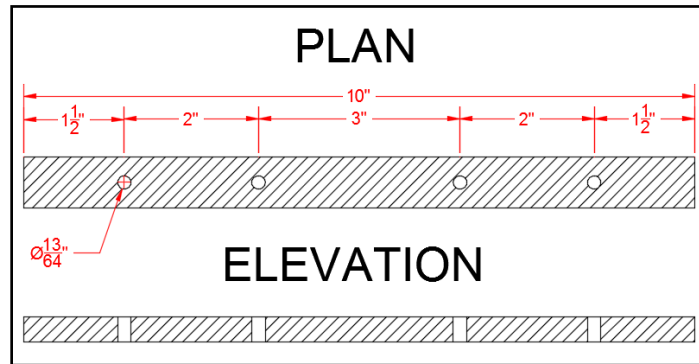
Specially designed mounting bracket used to attach LVDT's to specimen.
